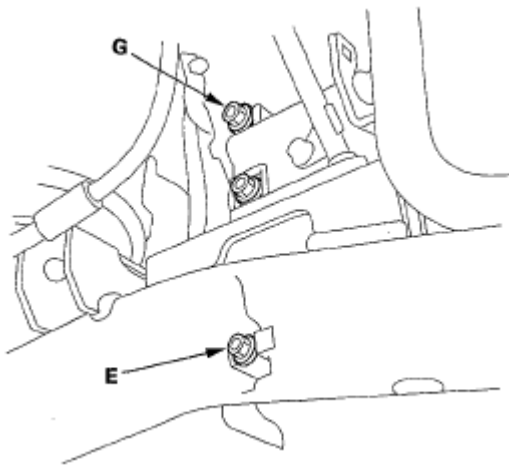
Identifying 3rd Clutch Pressure Inspection Port And 5th Clutch Pressure Inspection Port
